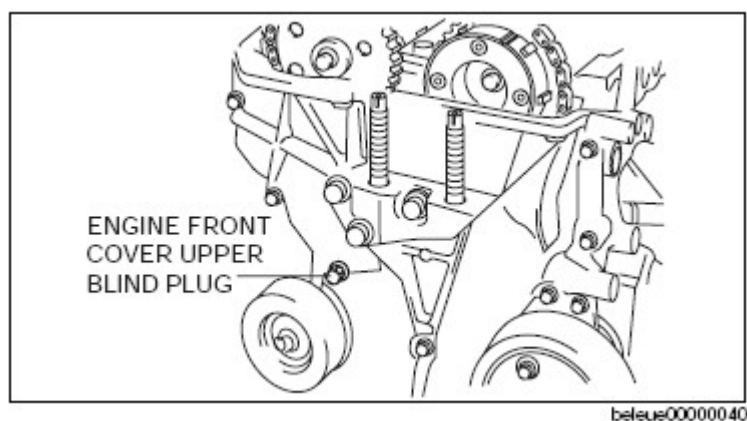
Identifying Engine Front Cover Upper Blind Plug
